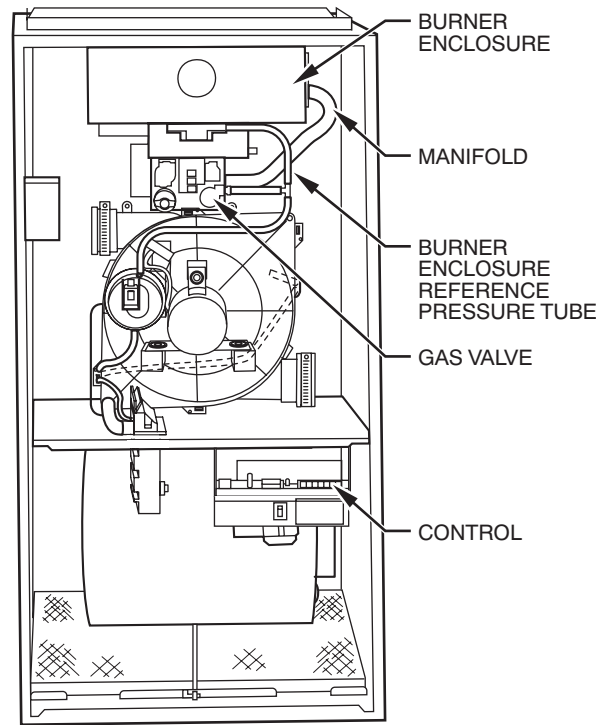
Multipoise, Hot-Surface Ignition, Fixed-Speed, Condensing Furnace Component Location (Upflow Orientation Shown)
